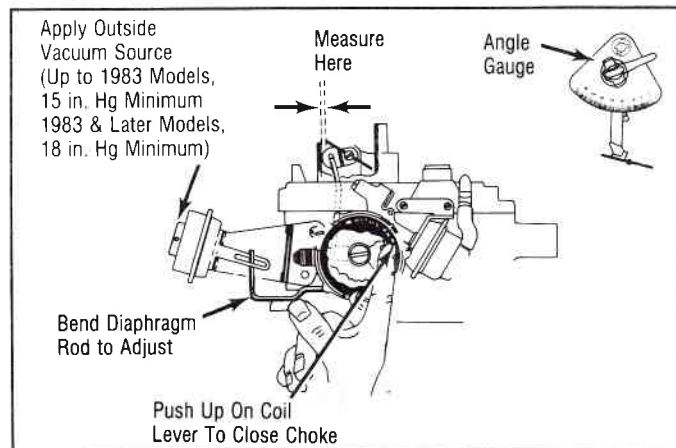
Rear Vacuum Break Adjustment (1980 and Earlier Models)
